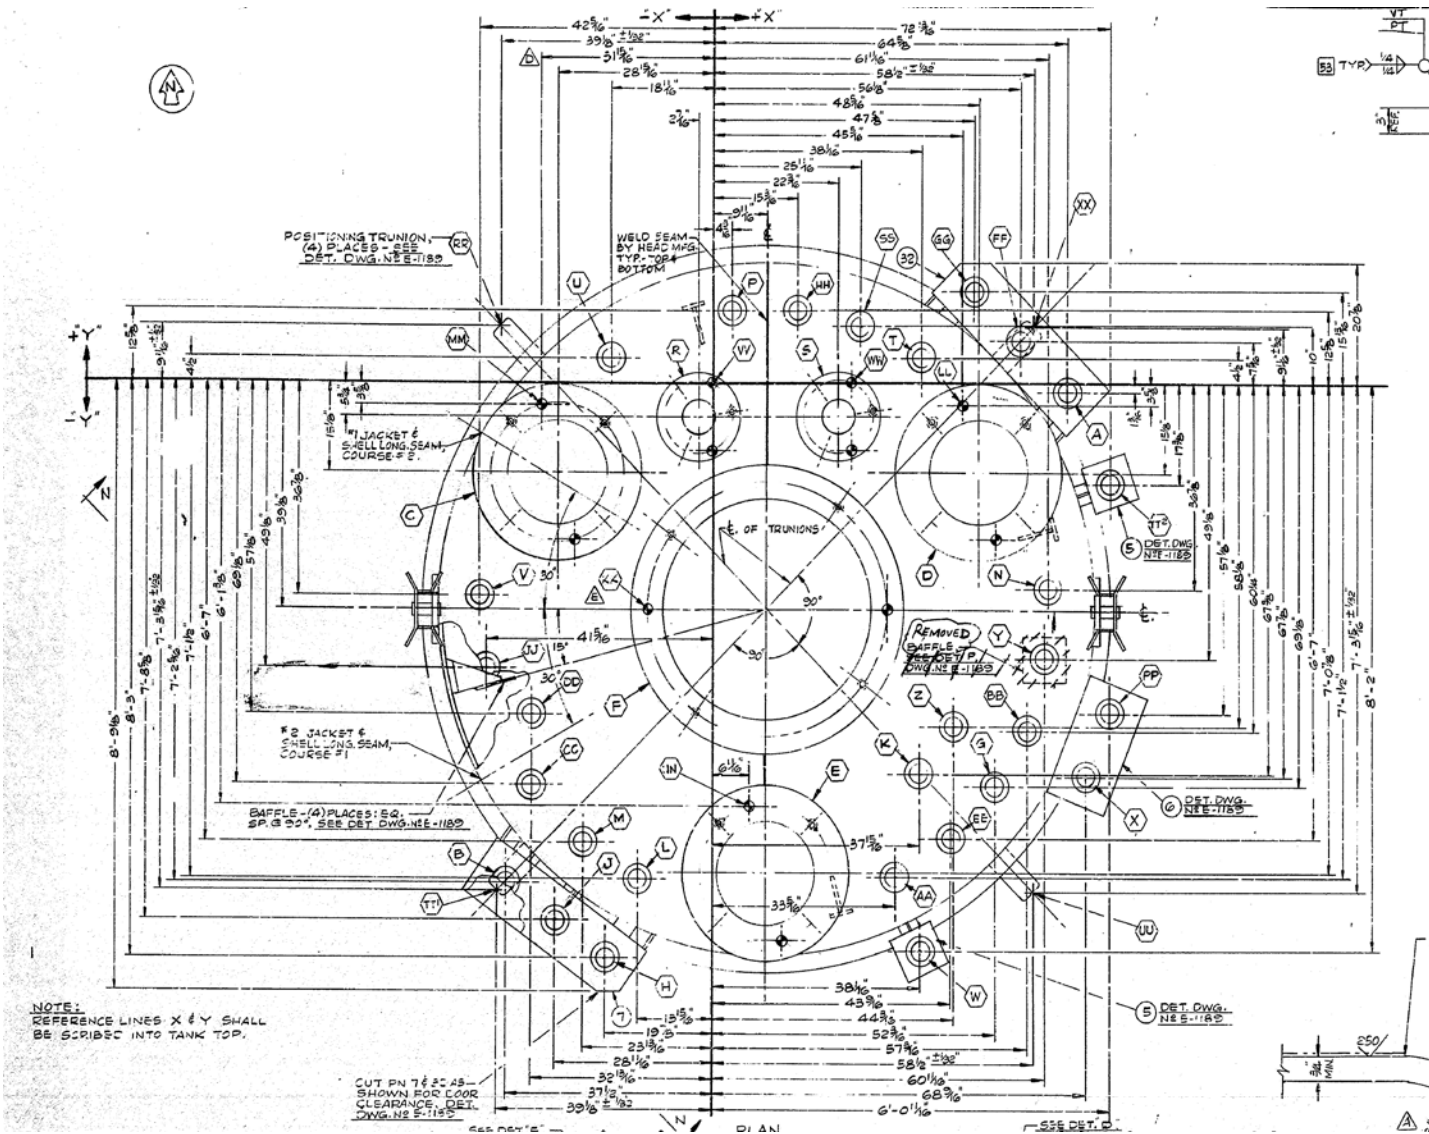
MFHT Plan View (From Drawing E-1188 Rev. 1)
